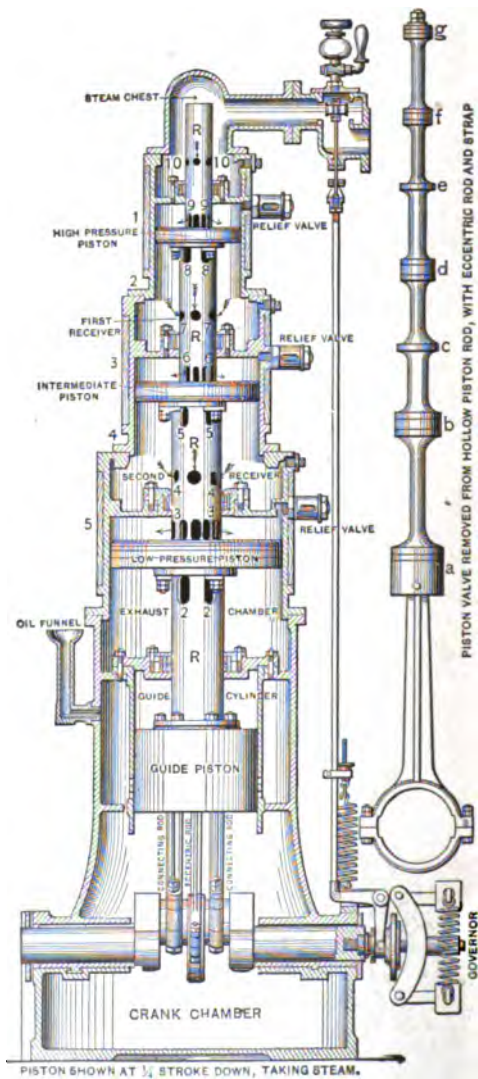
WILLANS TRIPLE-EXPANSION ENGINE.
